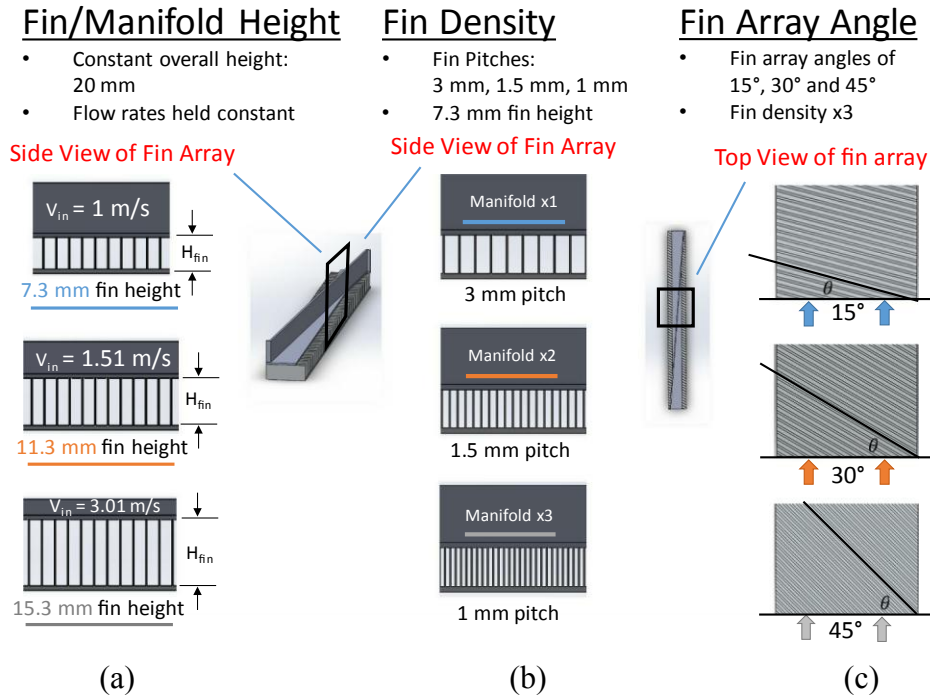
(a) Side view of 3D manifold fin array showing three heights of manifold fins. (b) Side view of 3D manifold fin array showing three pitches of manifold fins. (c) Top view of 3D manifold fin array showing three angles of manifold fins.
